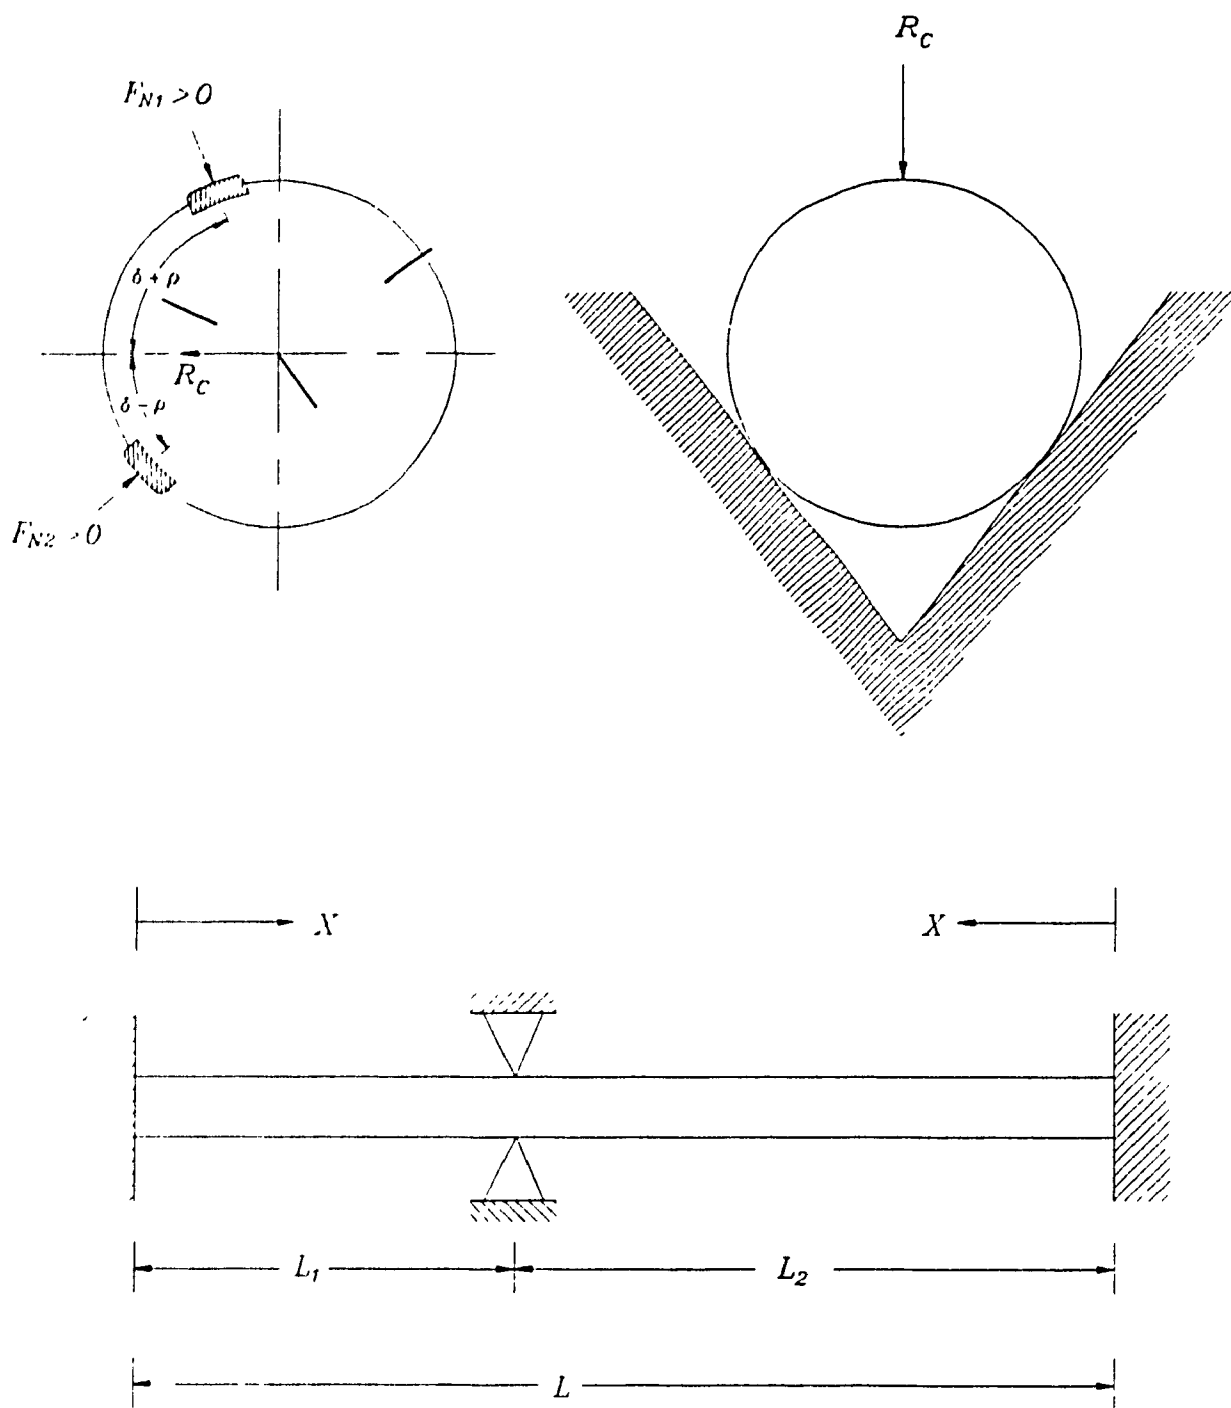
Model of Cutting Tool-Boring Bar Assembly at Stable Equilibrium
